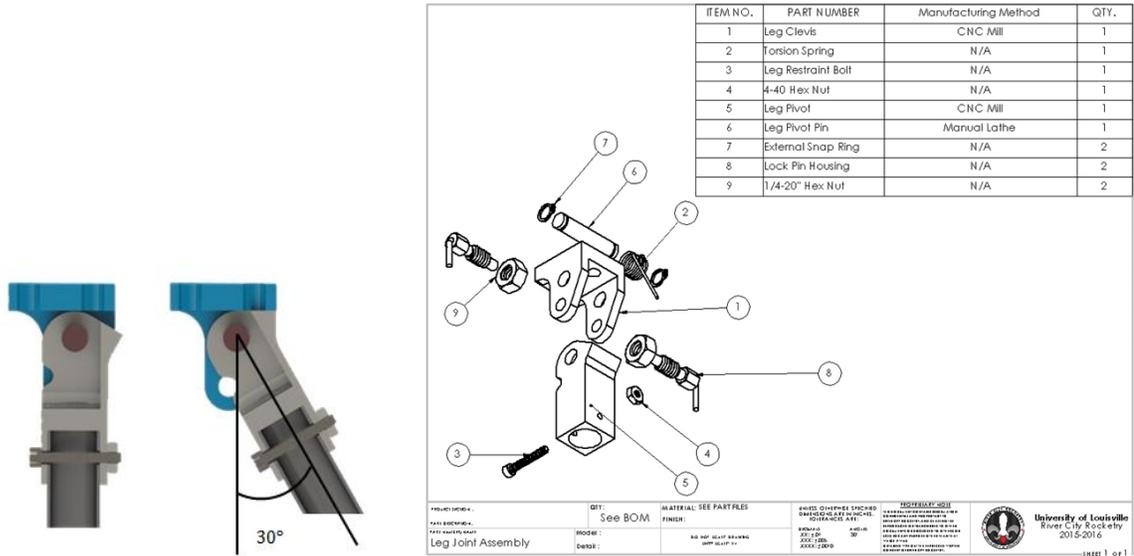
LLS stowed and deployed configuration with deployment angle and Detailed drawing of the Leg Pivot Assembly.
